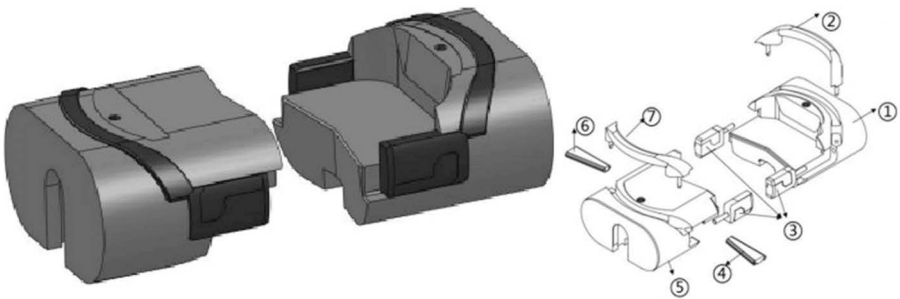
The ISR shear ram assembly. ① & ⑤ ram core; ③ side seal block; ② top seal; ④ & ⑥ bottom seal.
